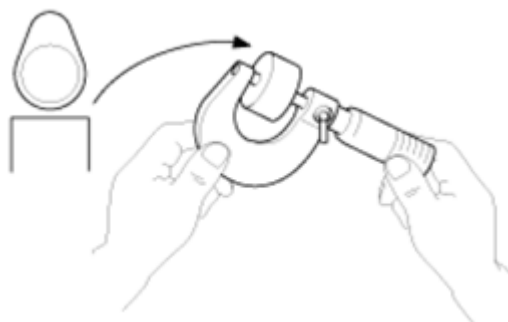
Calculating New Tappet Thickness Using Screw Gauge
